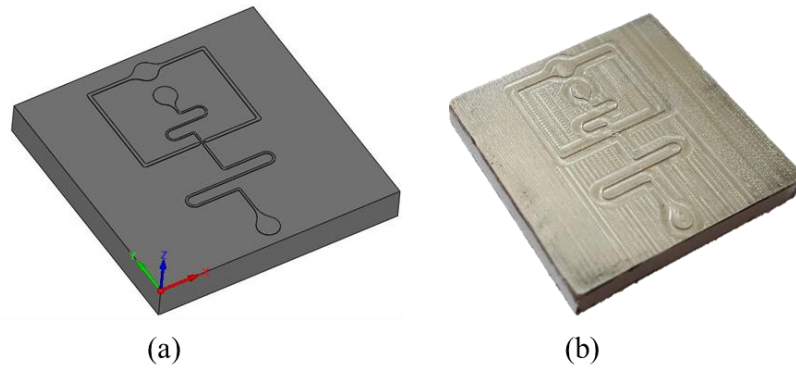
(a) The mold pattern design, (b) micromilled mold pattern.
